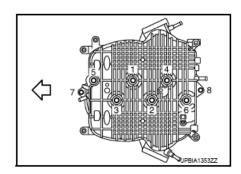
Intake Manifold Collector Mounting Bolt And Nut Tightening Sequence Courtesy of NISSAN NORTH AMERICA, INC.
